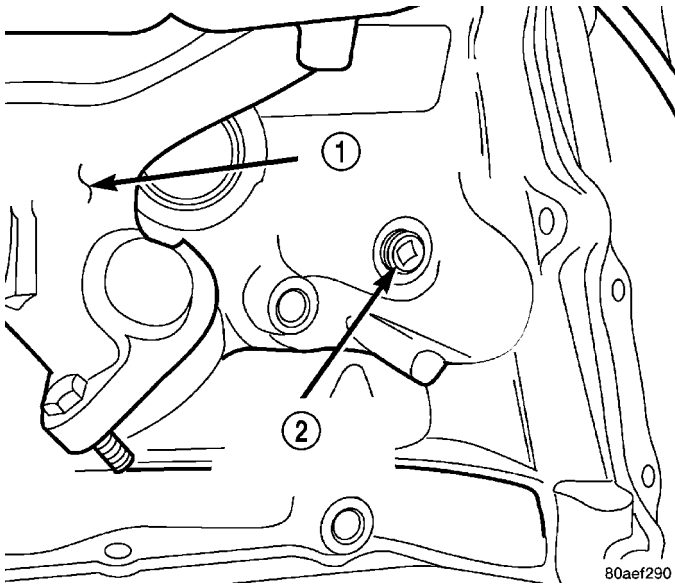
Draining Coolant From Block - 2.4L/4.0L Engines
